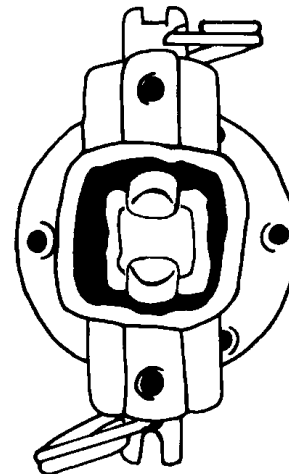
B - Worn Tooling Showing "Belled Out" Socket
